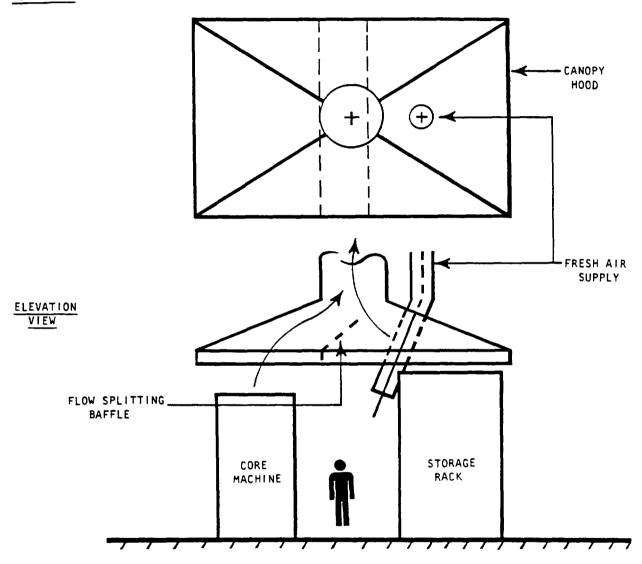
Canopy hood and fresh air supply for furan hot-box core machine
